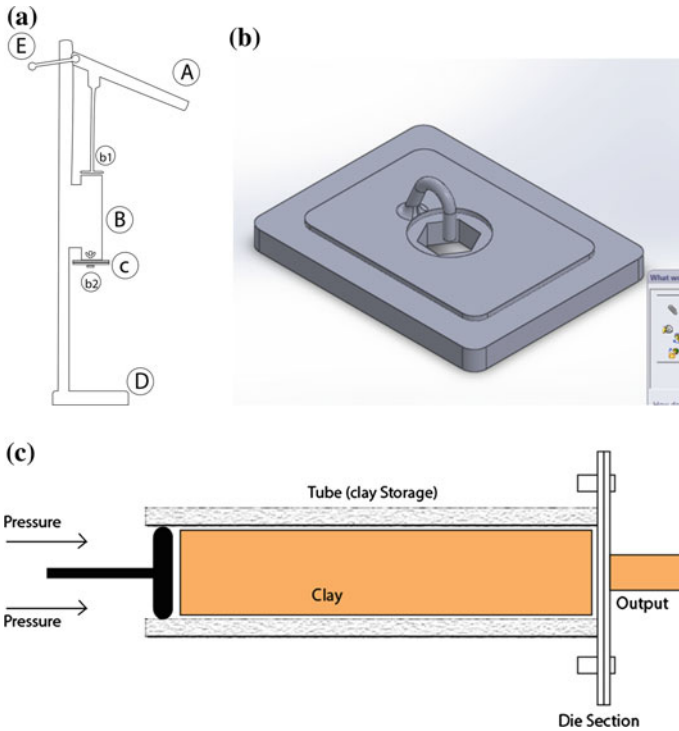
a Parts of the mini-extruder. b Die of mini-extruder. c Cross-section of process using mini-extruder
